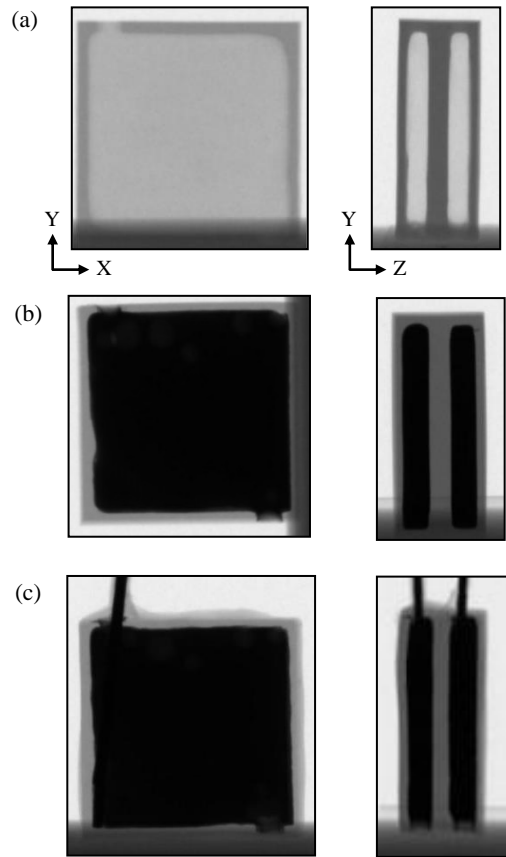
CT scan inspection of electrode channels: (a) before, (b) after filling using injection process in front and side view, and (c) with wire installed after capacitance measurement.
